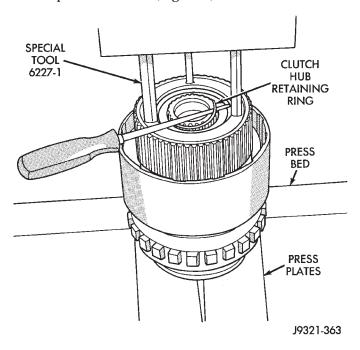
Direct Clutch Hub Retaining Ring Removal
